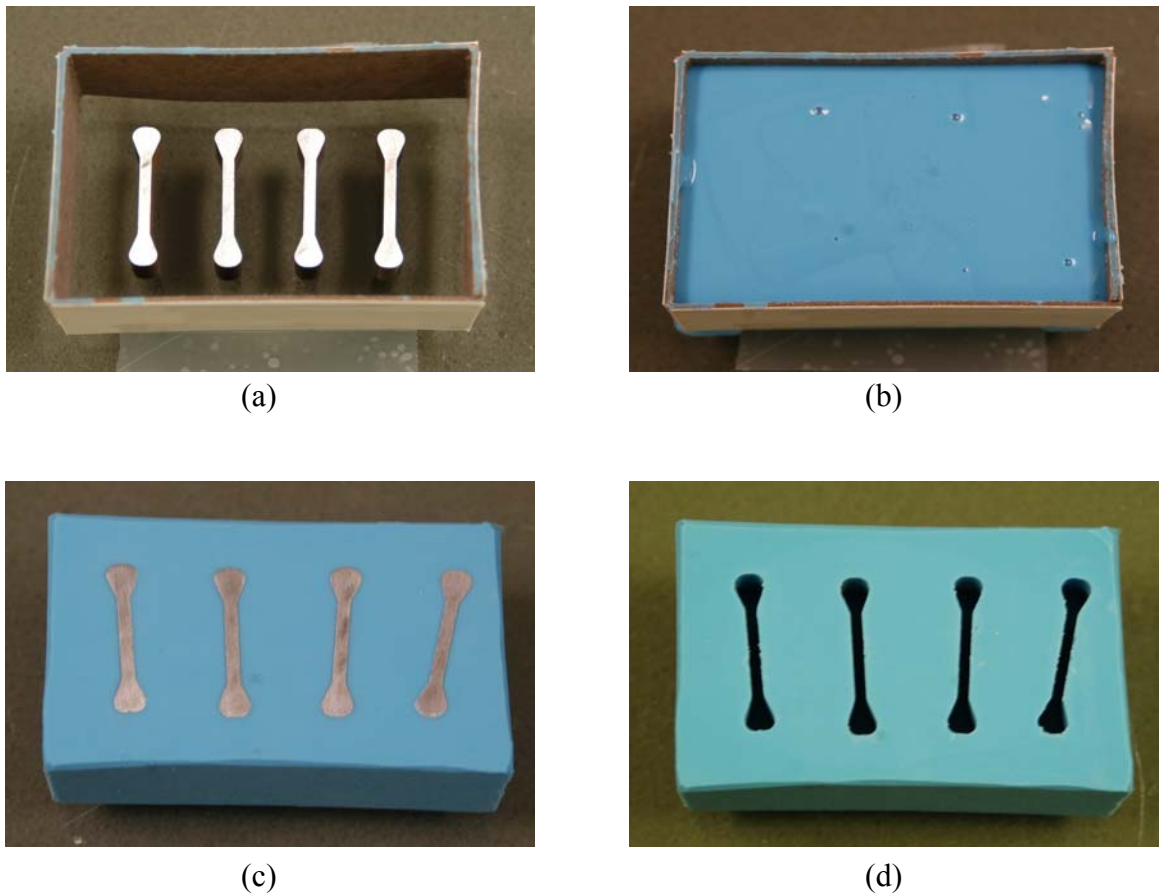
Mold fabrication process: (a) steel master specimens with cardboard barrier on glass substrate, (b) silicone rubber casting, (c) cured casting prior to removal of steel masters, (d) resultant mold cavity
